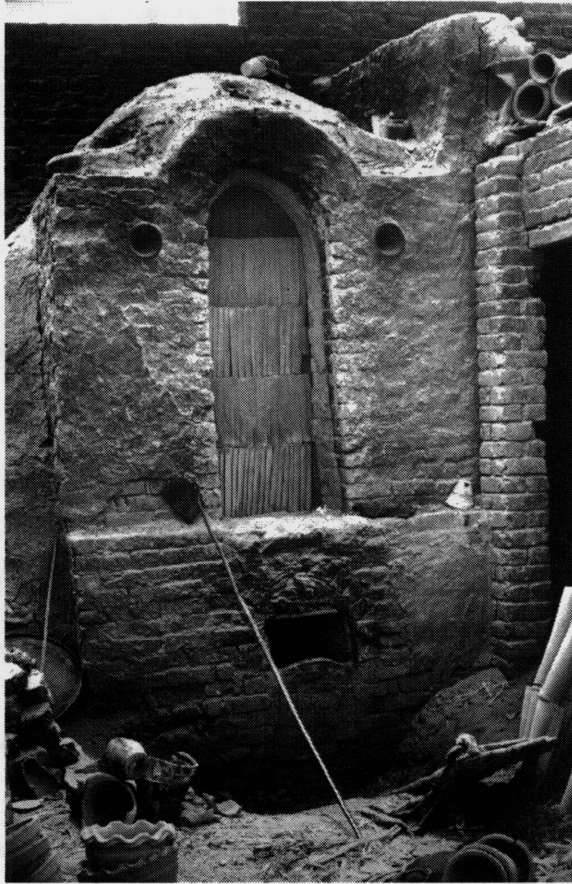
One of the two small kilns at the Old Cairo workshop, with roof tiles (*aramit*) stacked inside ready for firing. Note permanent roof on kiln and stokehole directly below entrance to kiln where tiles are stacked.
